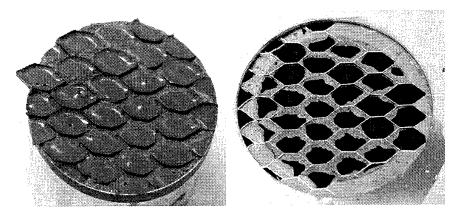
Failure surfaces resulting from tensile testing of the Dura-Core honeycomb and JD Lincoln adhesive control specimen, indicating a mixture of cohesive failure and fillet bond pull-out.
